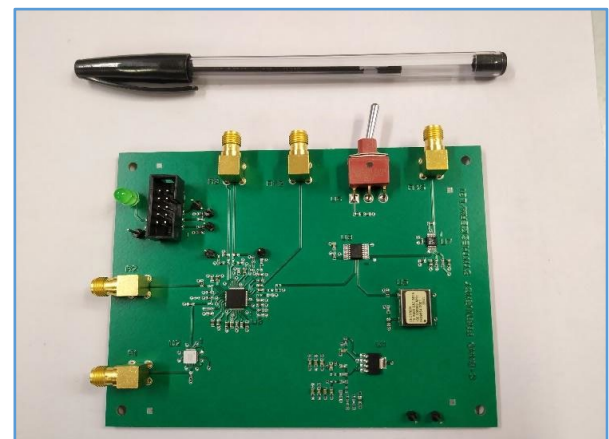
Frequency Synthesizer PCB Card on RO4350 substrate
